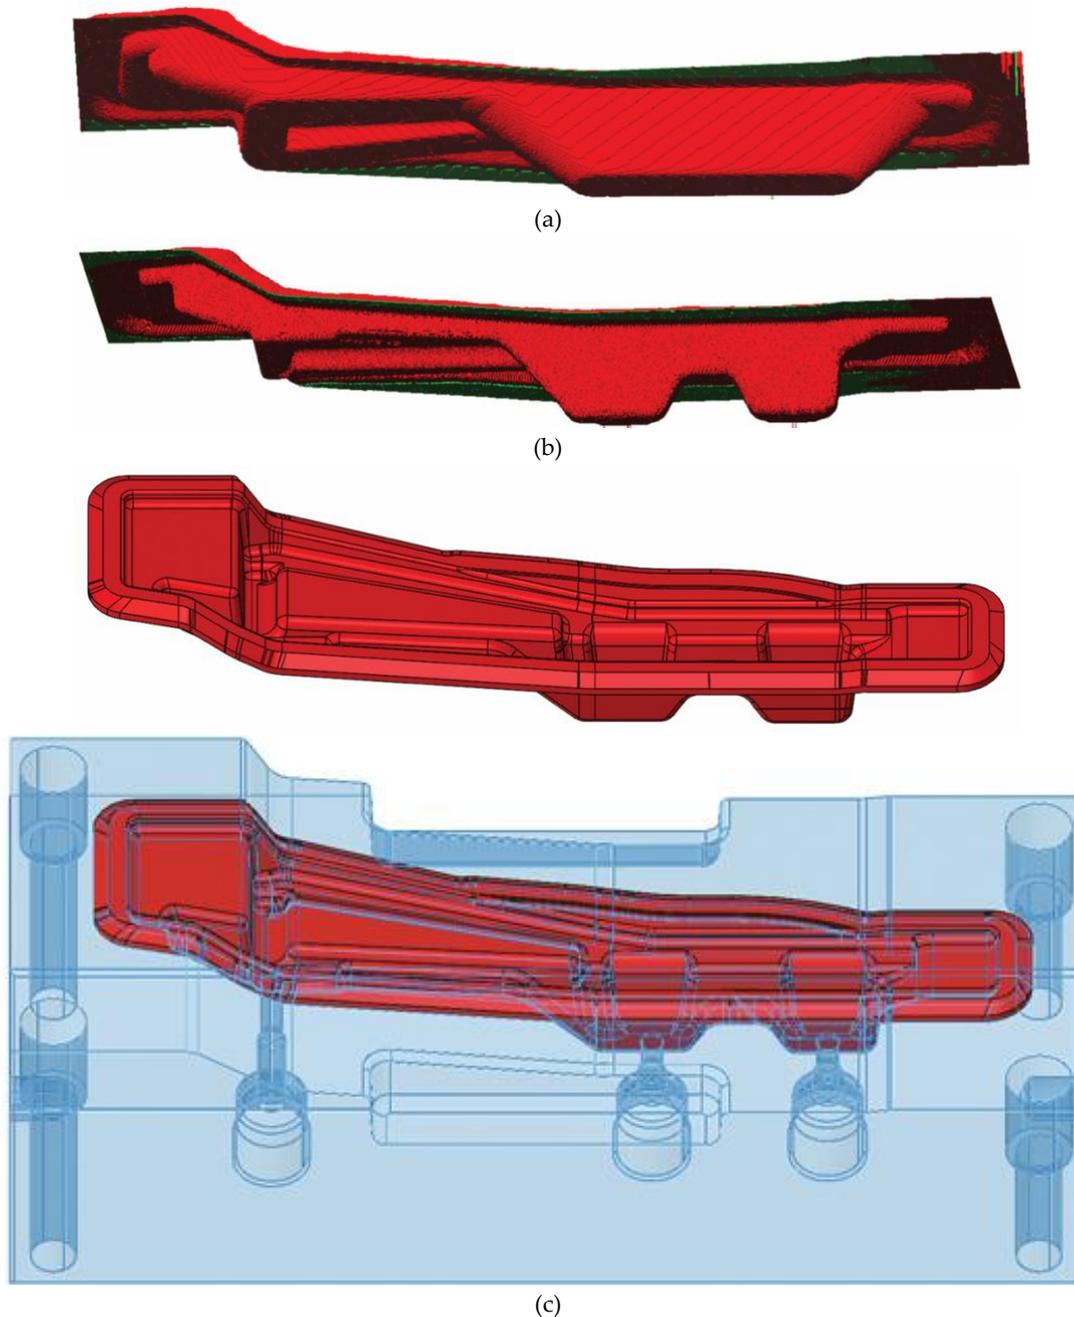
The measured volume of the padding weld and machining allowance: a) the padding weld by comparing the scan of the die before and after the surfacing process; b) machining allowance by comparing the die's scans before and after machining; c) a suggested allowance with an average thickness of approx. 3 mm
